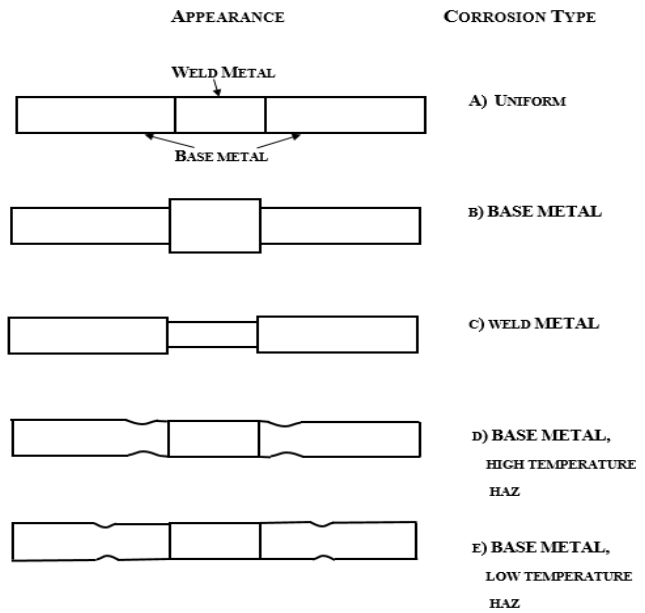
Types of corrosion in welded joint [11].
